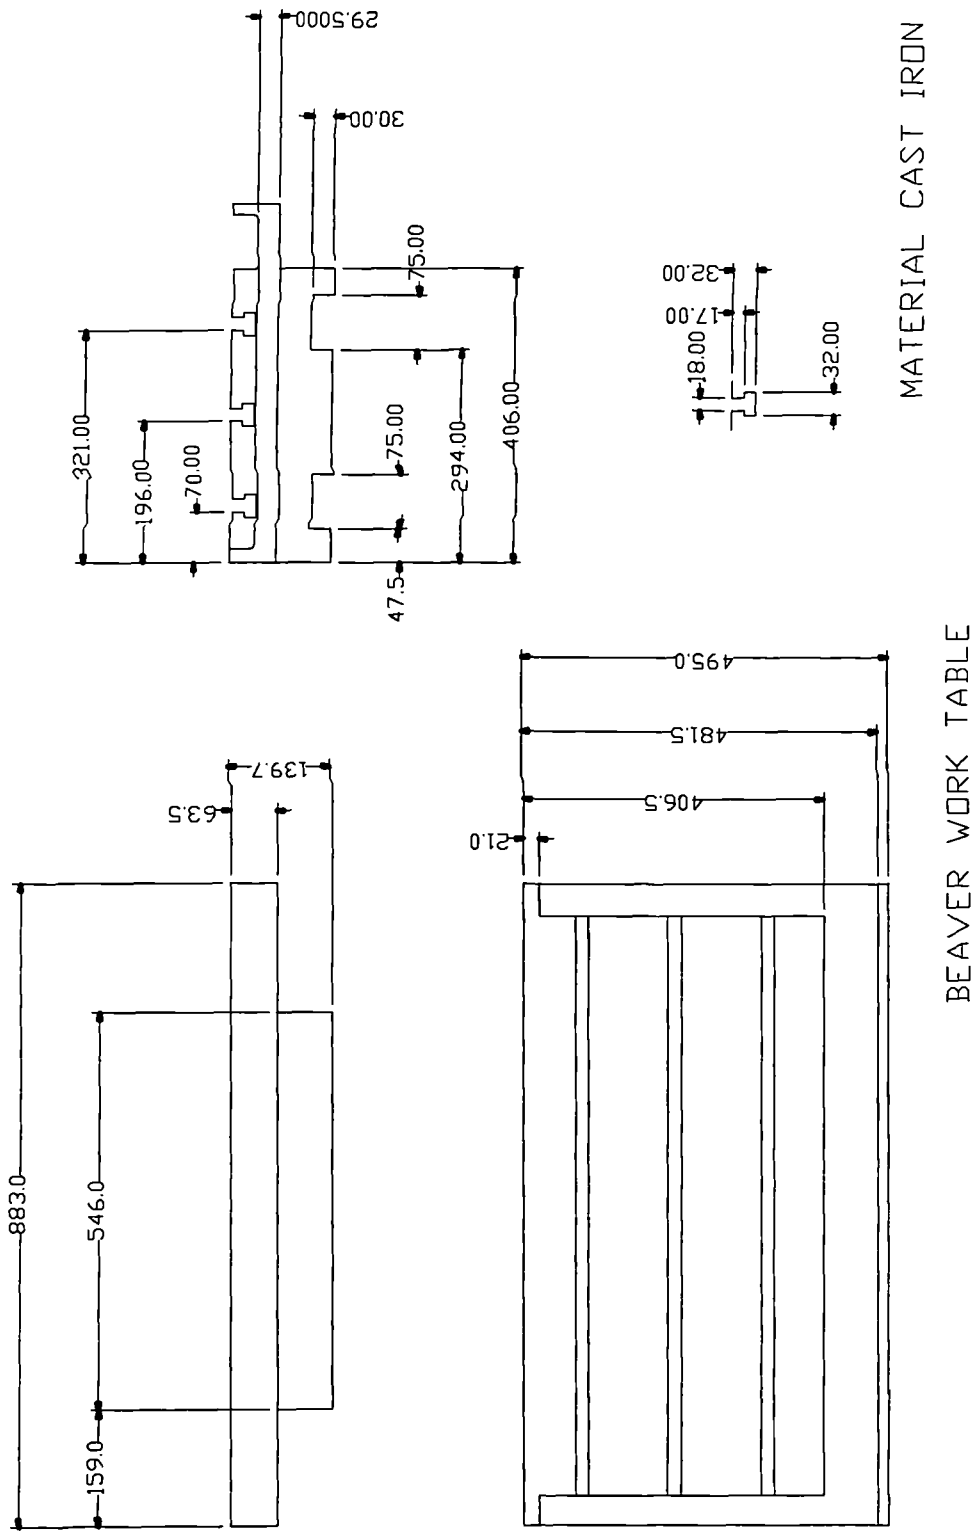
1. Worktable dimensions for CNC machine tool Beaver VC35
